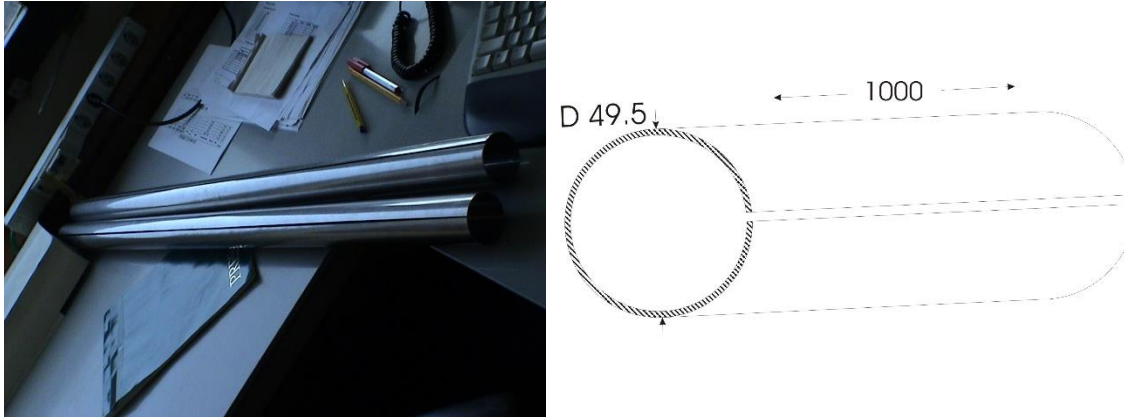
The stainless steel support tube of the Internal Heating Apparatus
